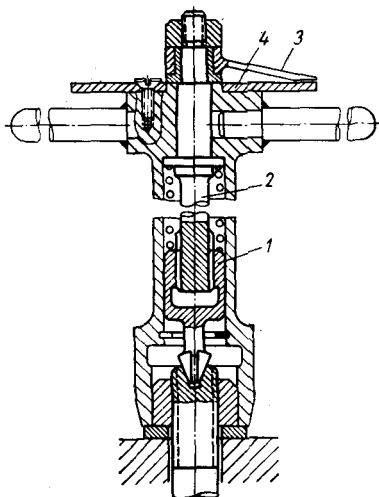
Wrench design enabling accurate measurement of nut turning angle relative to bolt
